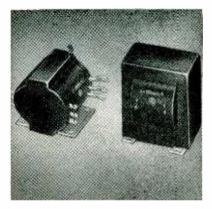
Immersion-resistant light-weight transformers are vacuum-molded in thermosetting polyester resin
